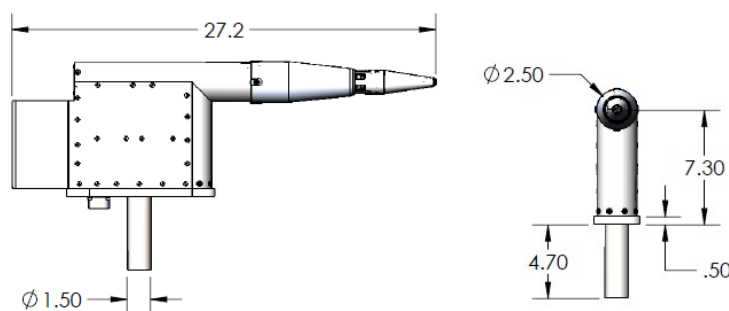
Brechtel P/N 83-00042-01 overall dimensions (inches)
